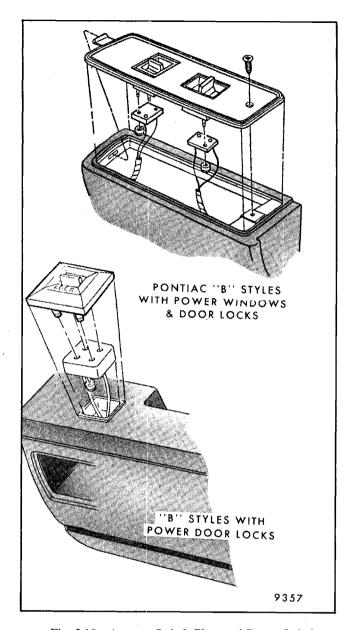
Armrest Switch Plate and Power Switch Attachment - B Styles
